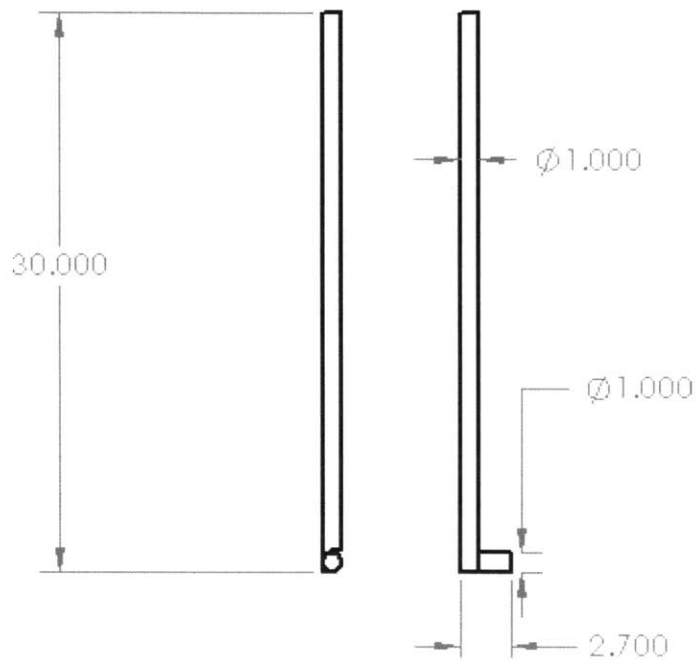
Front and side view of the copper electrodes. The heater is mounted between two such electrodes (dimensions in cm)
